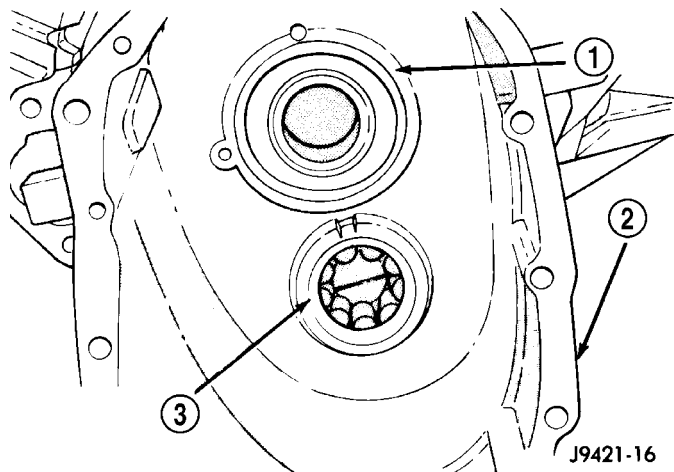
INPUT AND COUNTERSHAFT BEARING RACE
